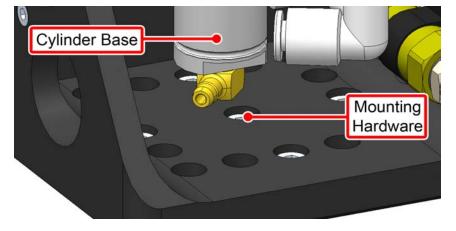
ANT95-L-Z Mounting Pattern / Pneumatics Cylinder Clearance
